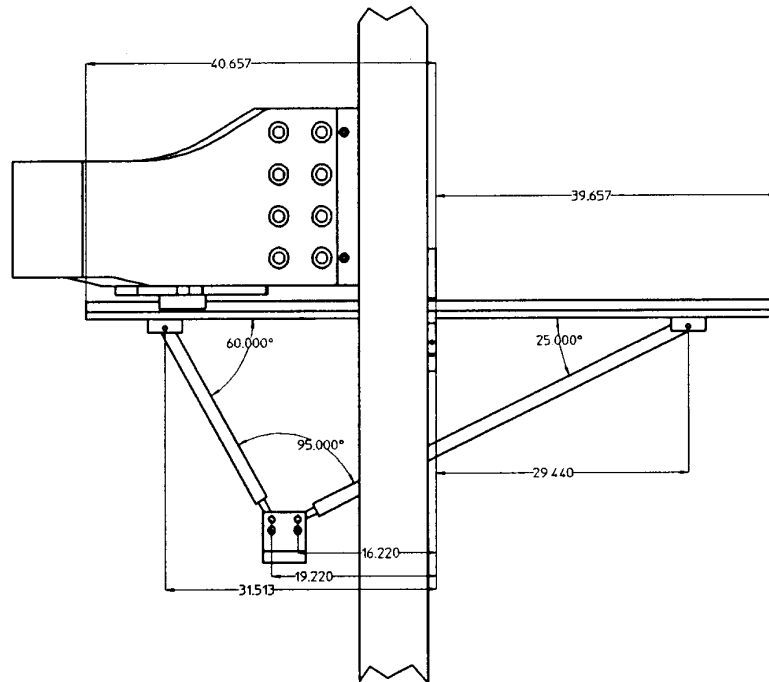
TPC Support Arm Installation Fixture assembled dimensions.
